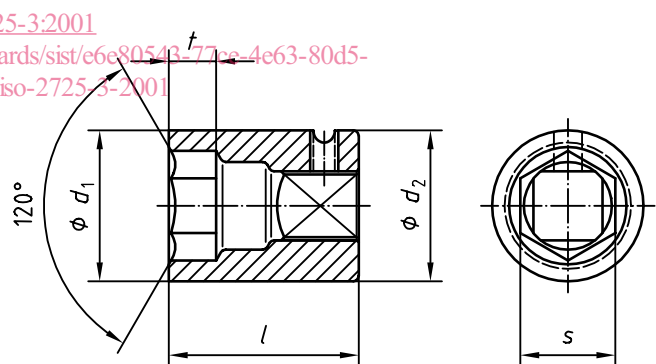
Socket shown with type J square conforming to ISO 1174-2
